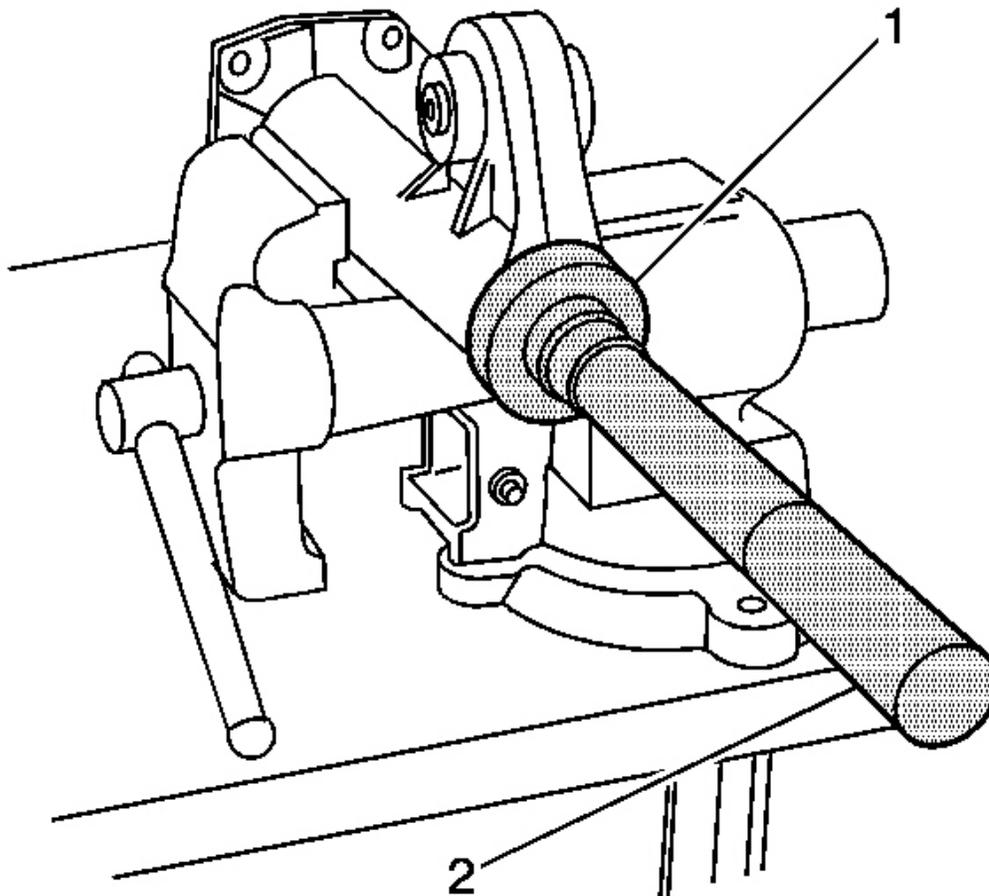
Installing Bearing With Square Shoulder Using J 36609 & J 8092
